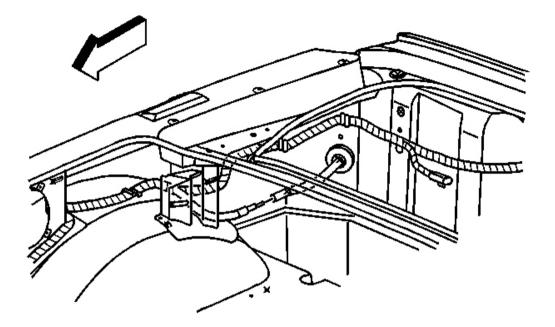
Front Body Wiring Harness At Rear Compartment Side Wall Courtesy of GENERAL MOTORS CORP.
